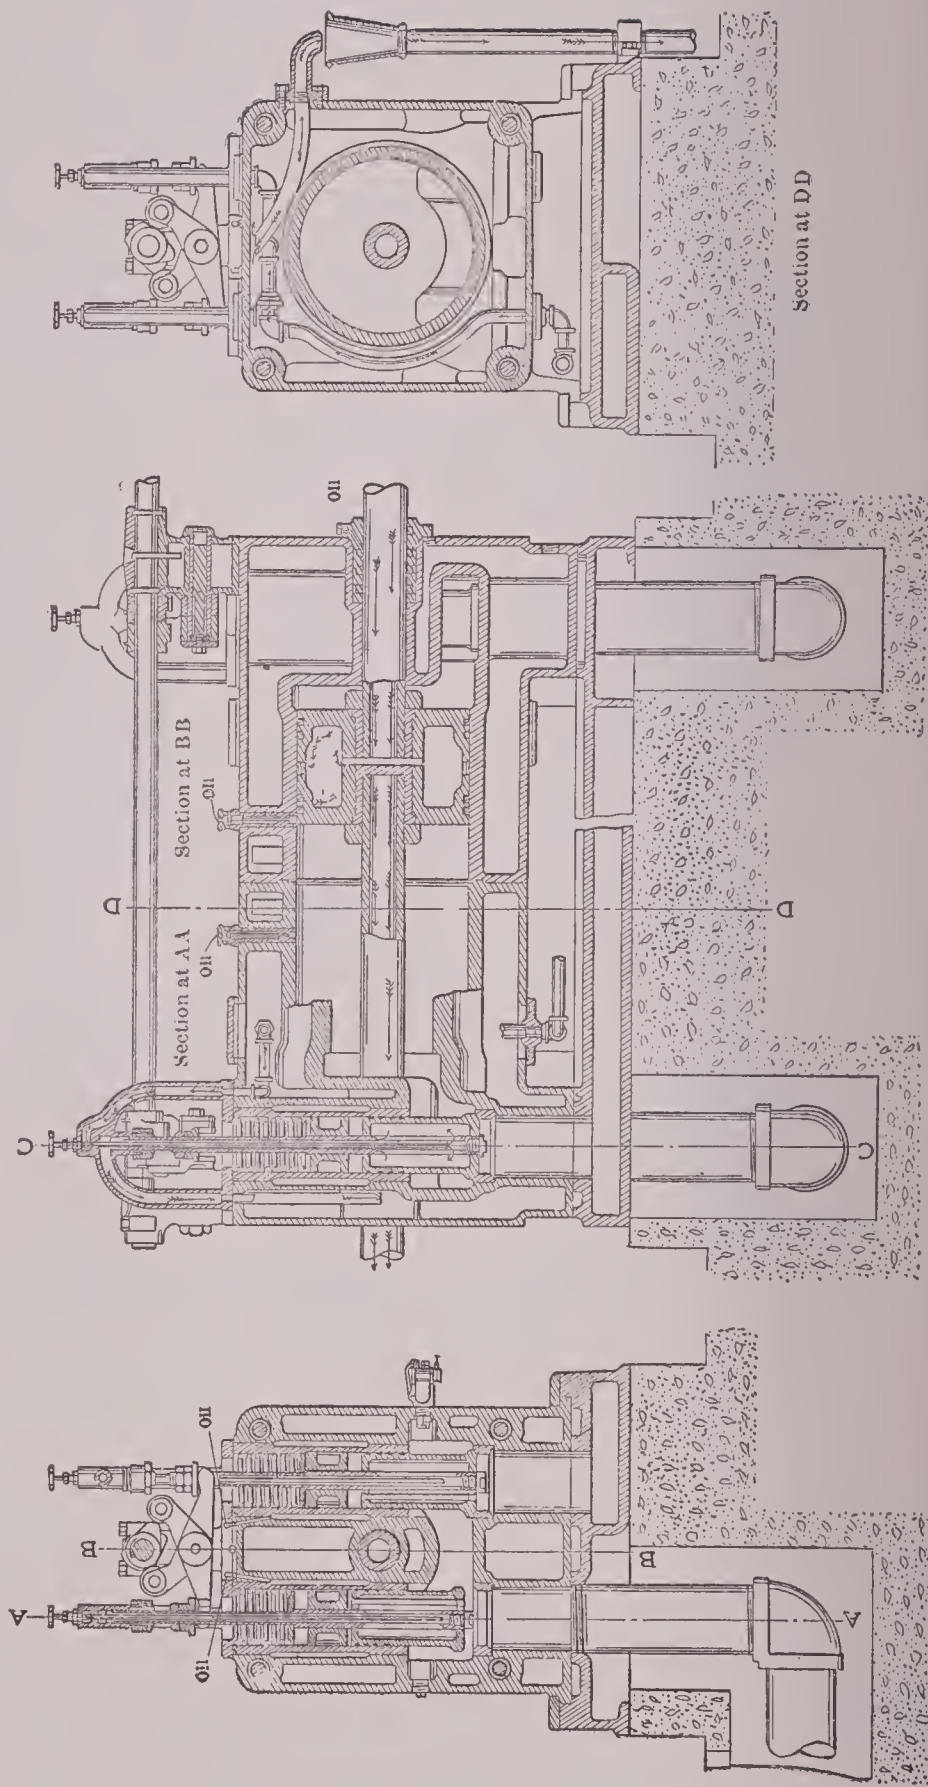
Section of Cylinder, showing Valve Arrangement.
